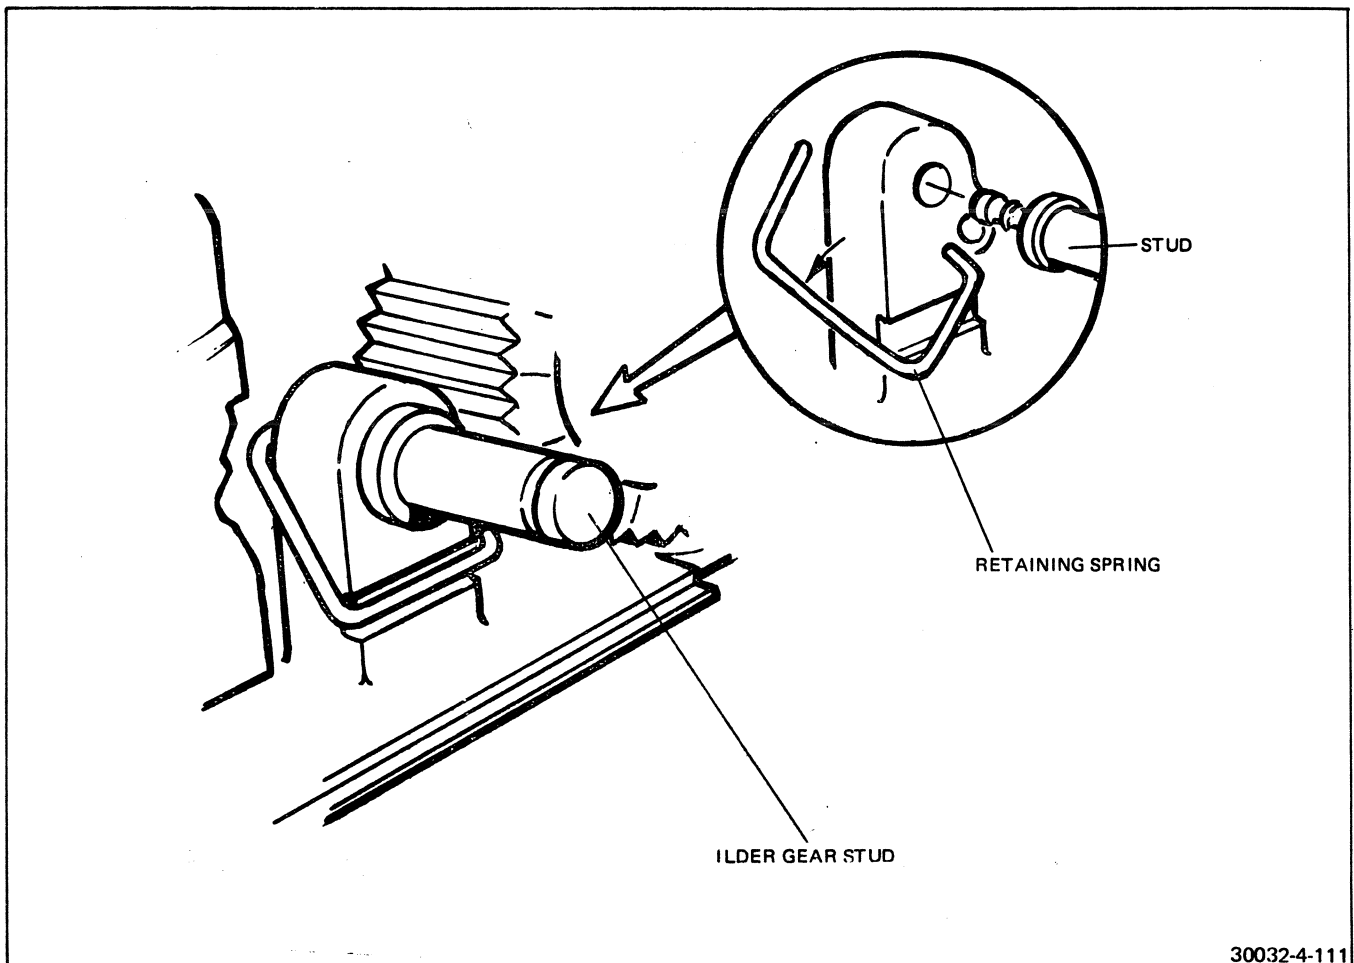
IDLER GEAR STUD REMOVAL
